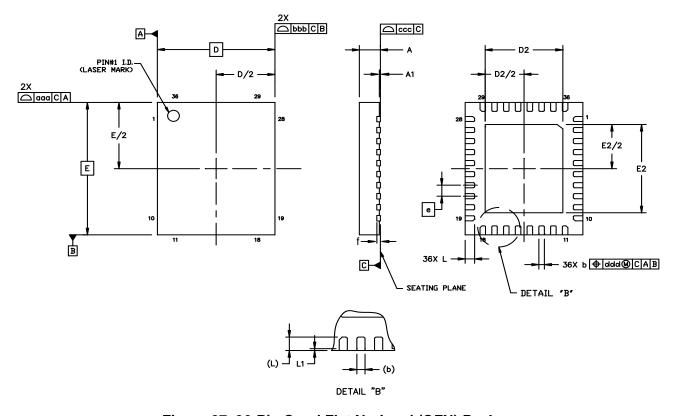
36-Pin Quad Flat No-Lead (QFN) Package
